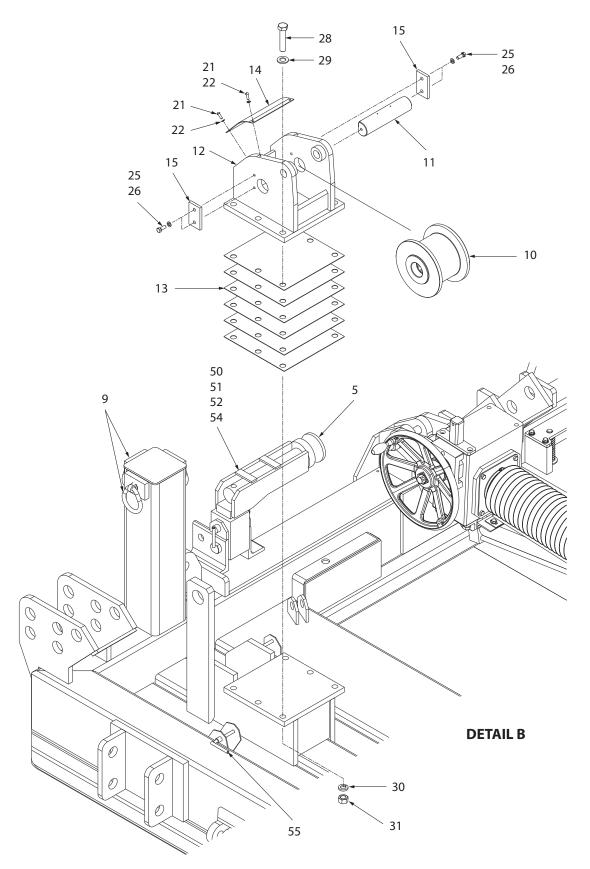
AGSE-E18401-S01 Base Assembly
